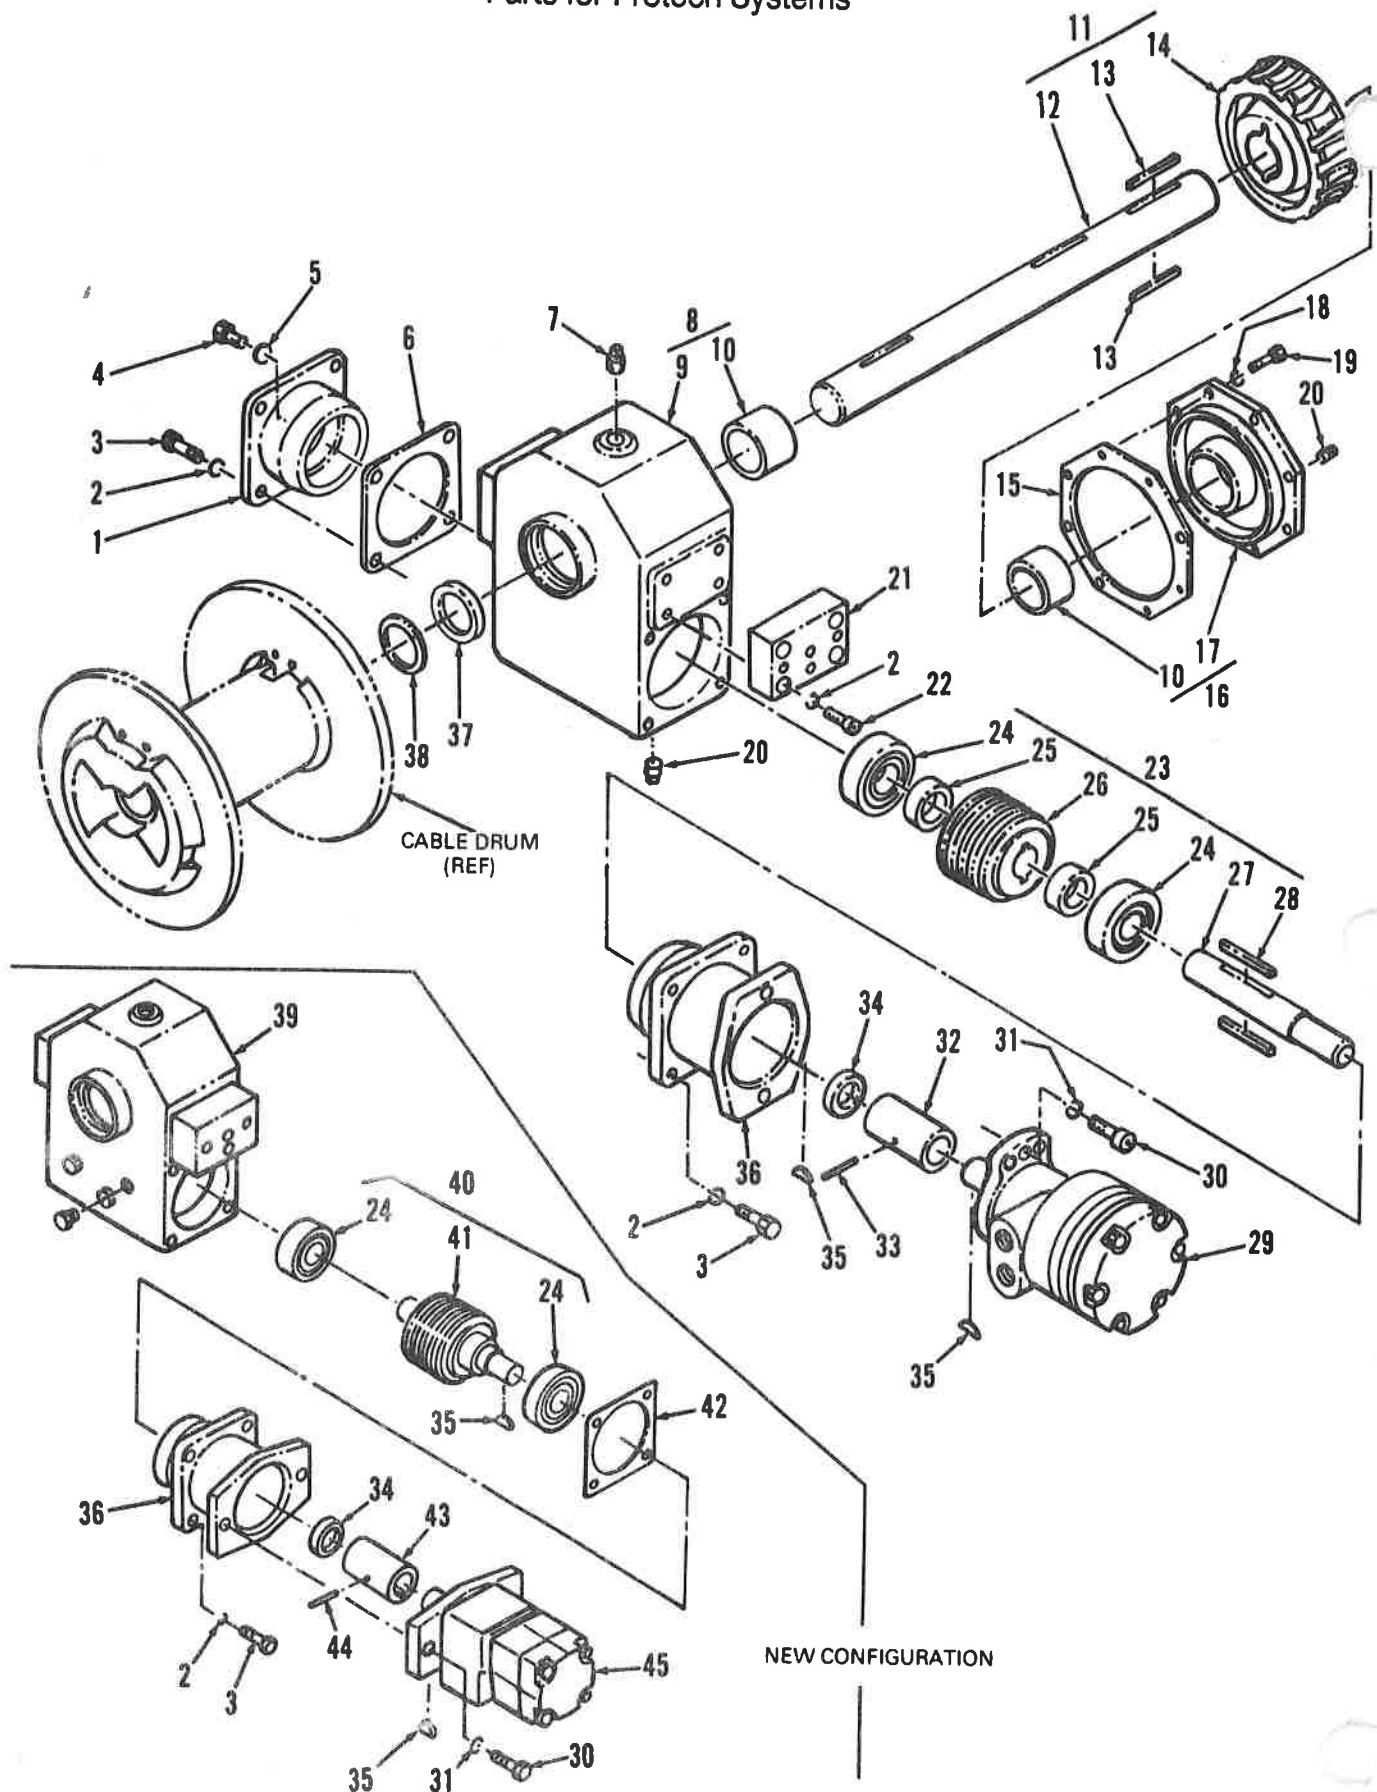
Transmission with Motor (GS32B) for 3105 Wrecker.
